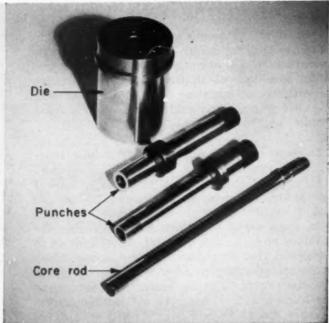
Die, punches and core rod used for making a cylindrical bearing and method of forming
